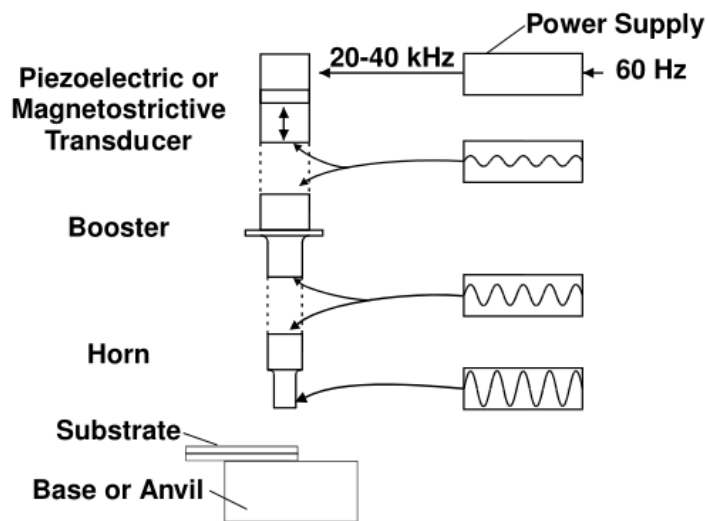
Schematic diagram of an ultrasonic welding device [5]
